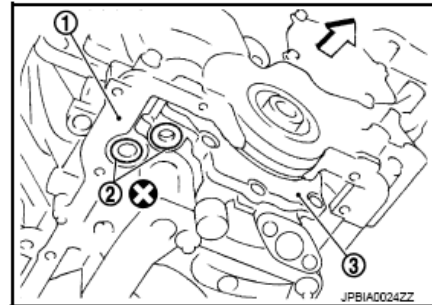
Locating Oil Pump, O-Rings And Lower Cylinder Block
